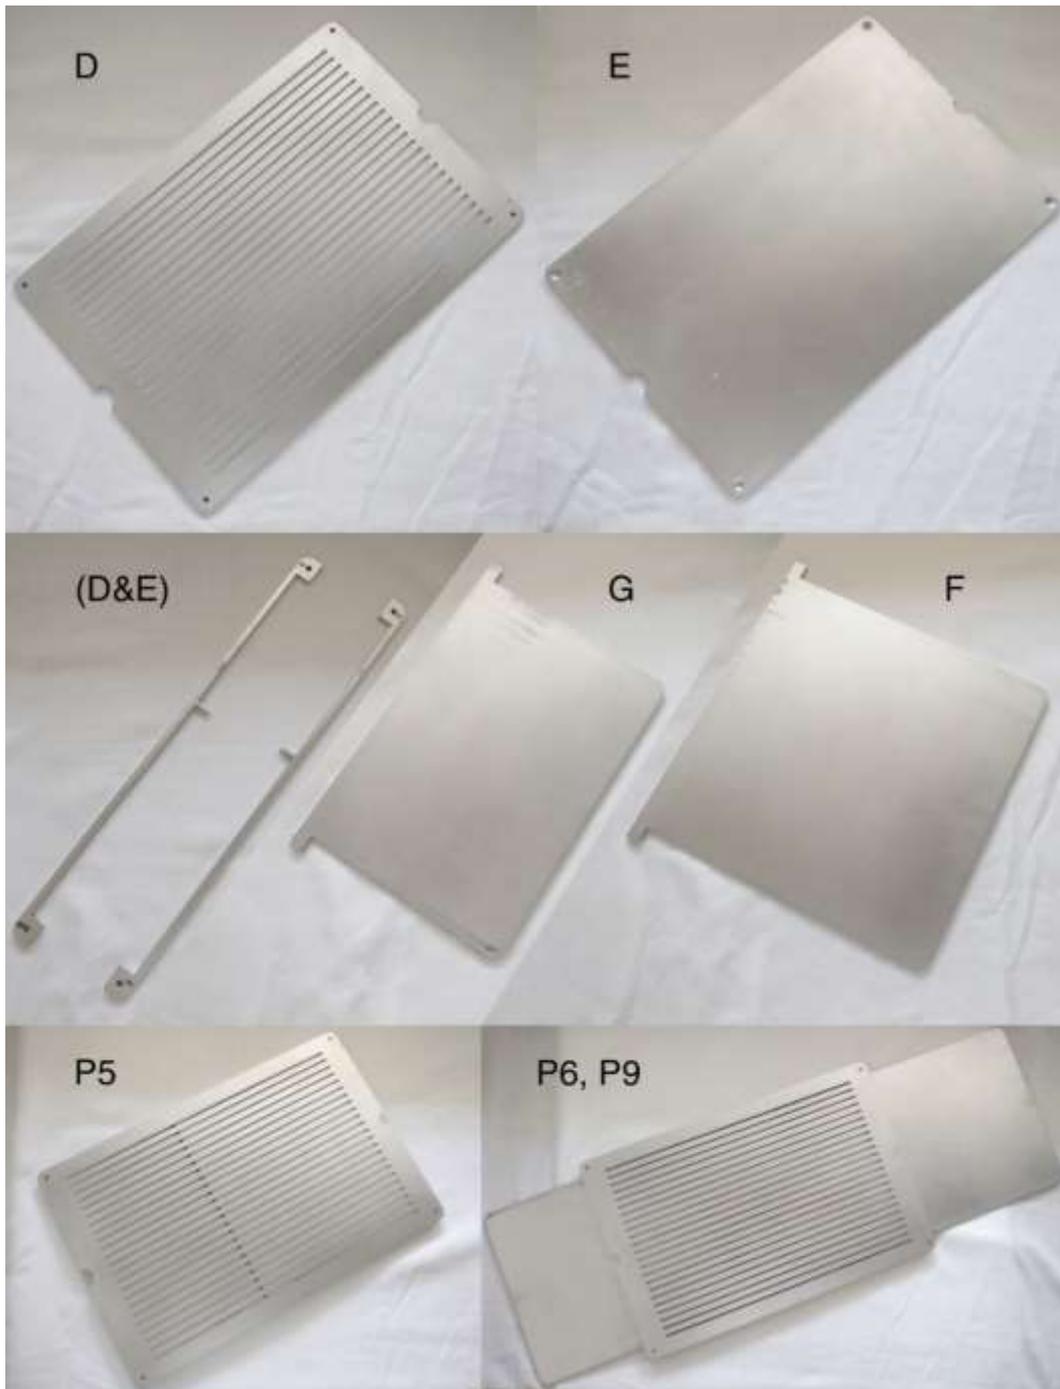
Different parts obtained by using a laser cutting machine of the prototype of the lapdesk and respective assembly.
